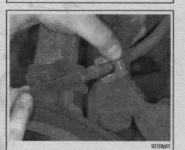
Remove the retaining clip, then remove the brake caliper hose from the steering knuckle
